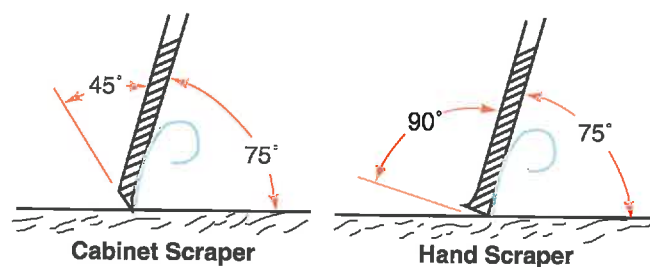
Cabinet and hand scraper edges are shaped differently.
